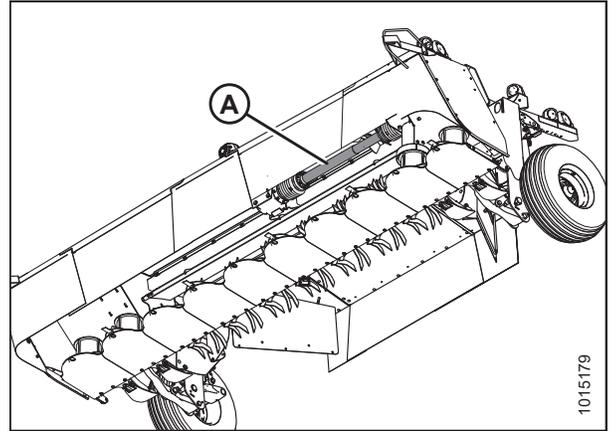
Lower Left View of Rotary Disc Pull-Type
